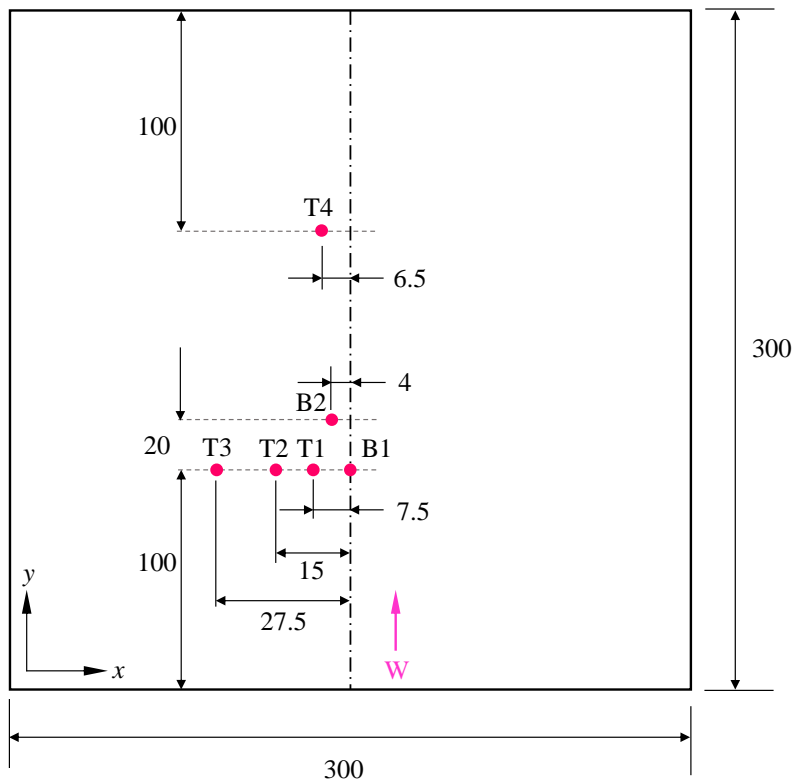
The location of thermocouples attached to the top and bottom sides of the bead-on-plate welded specimen in Publication I. The welding direction was in +y direction and all the dimensions are nominal ones in mm. B1 and B2 are thermocouples on the bottom side, and T1–T4 are thermocouples on the top side.
